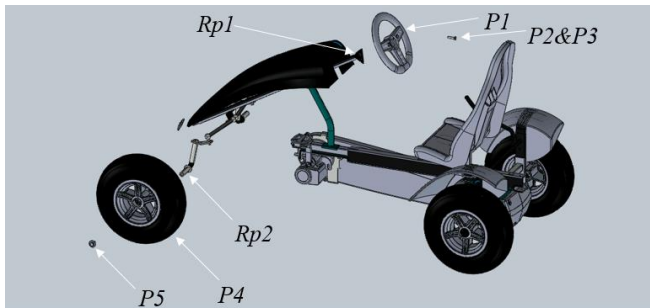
Parts of the assembly process and Features of the pedal car (*P0*)
